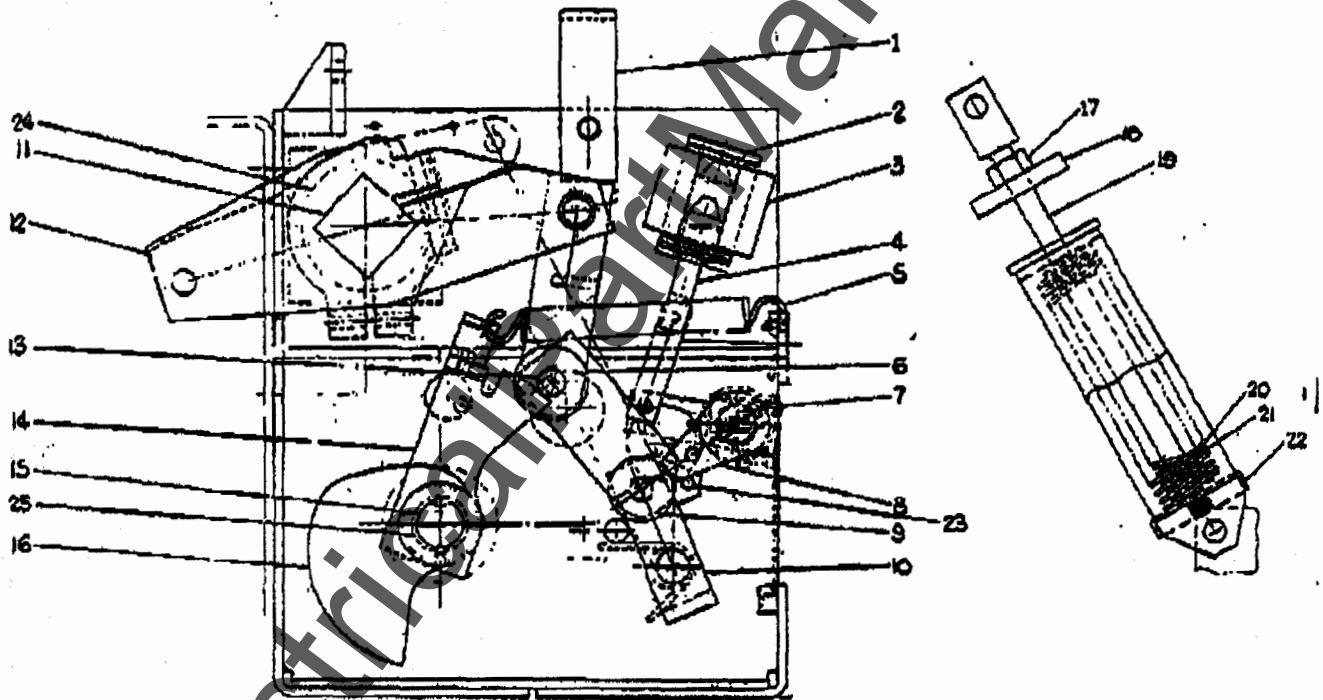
(0114C5320) Sectional Side View of Mechanism
